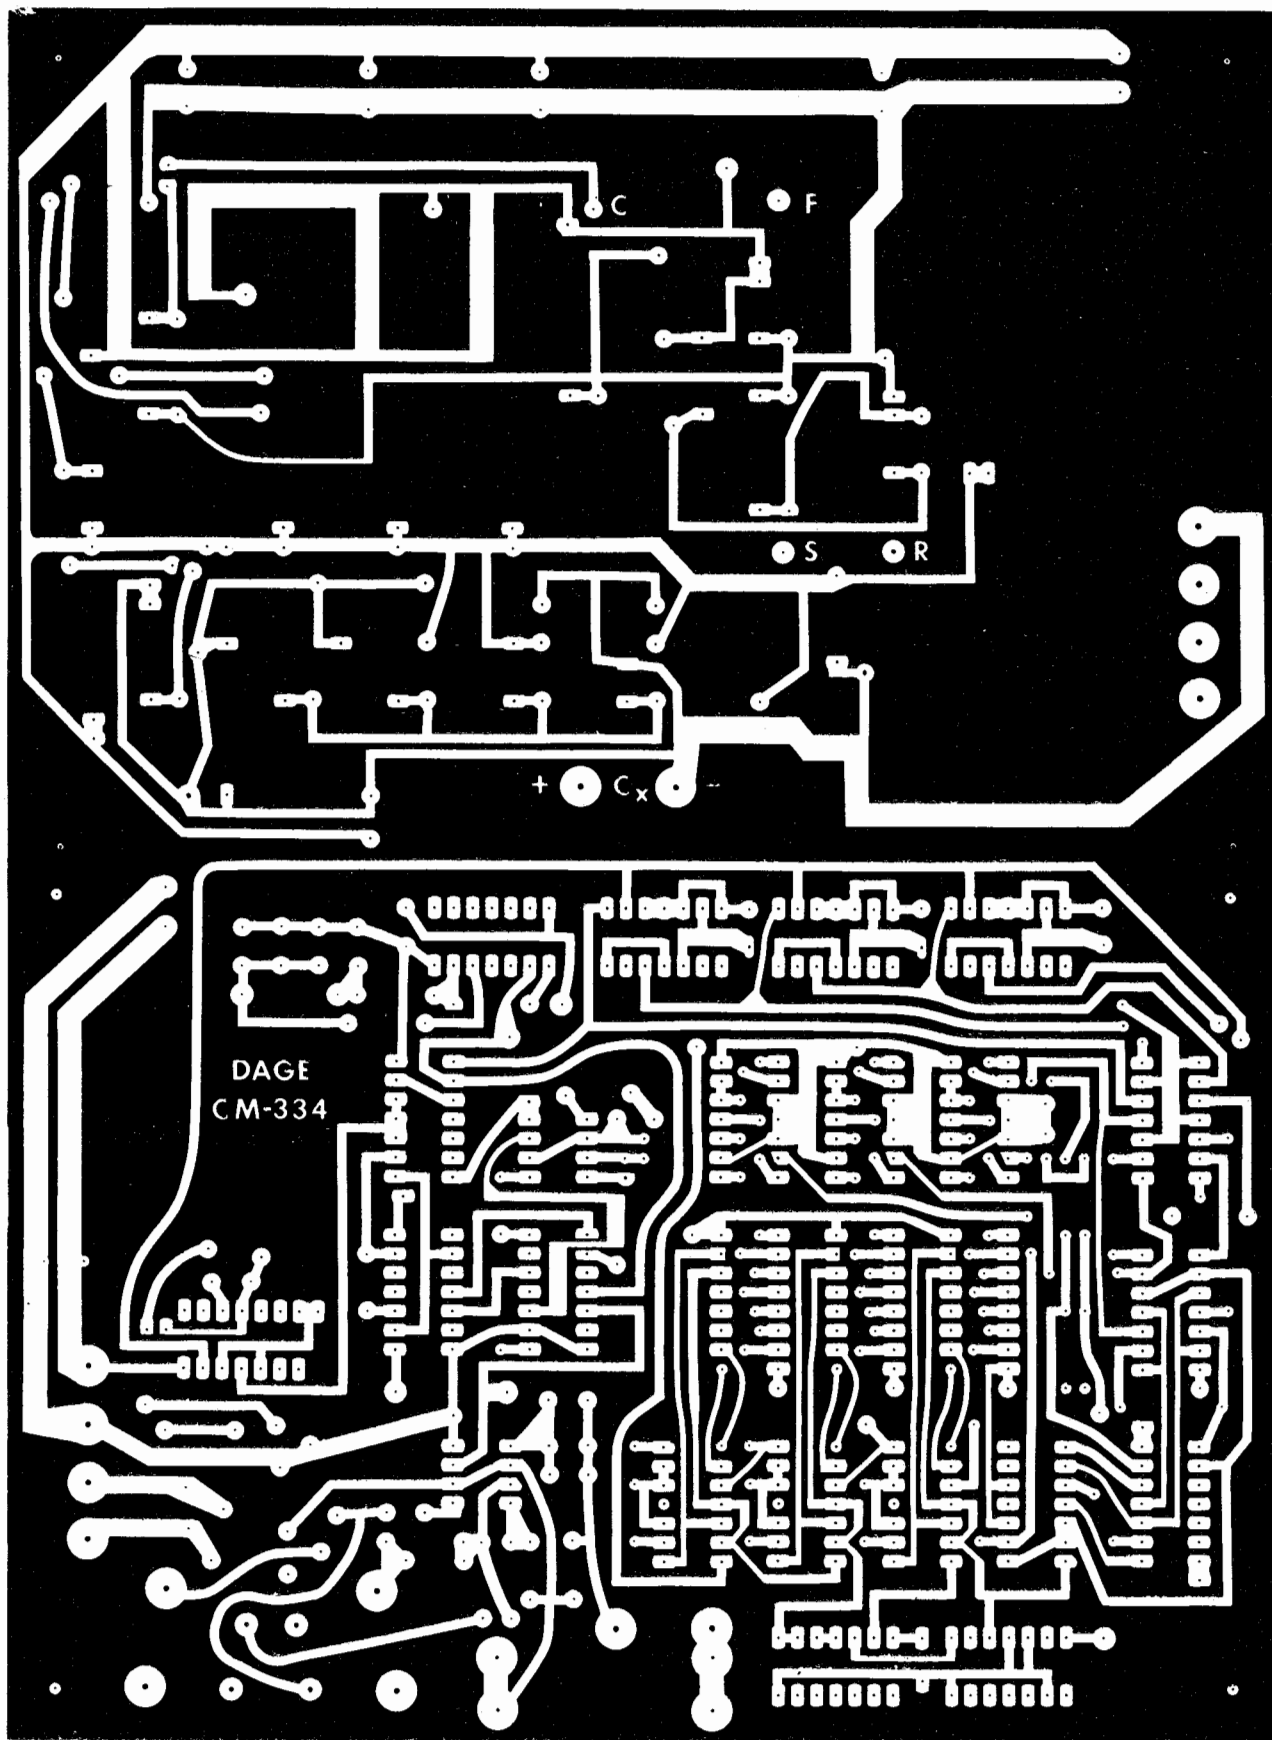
Actual-size etching and drilling guides for the double-sided pc board.
